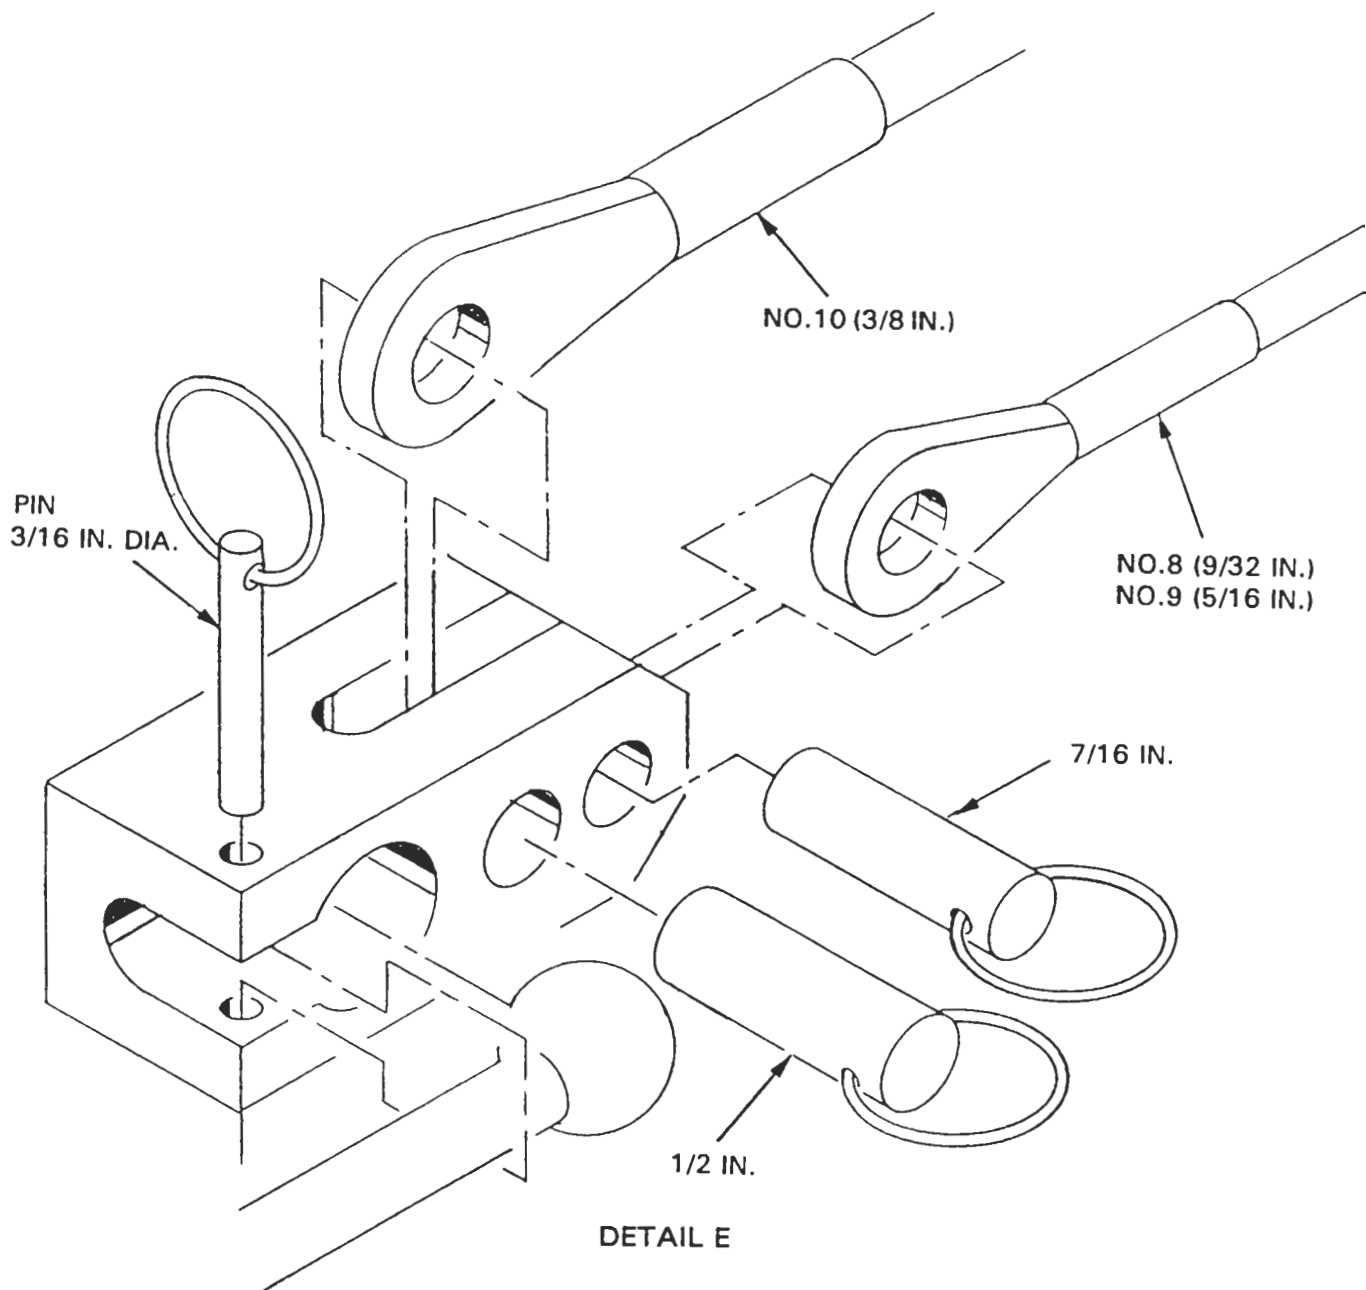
Cable Tensiometer Test Setup (Sheet 5)
